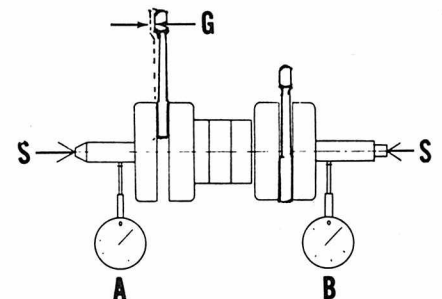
Refer to text for checking crankshaft for correct assembly or wear.
